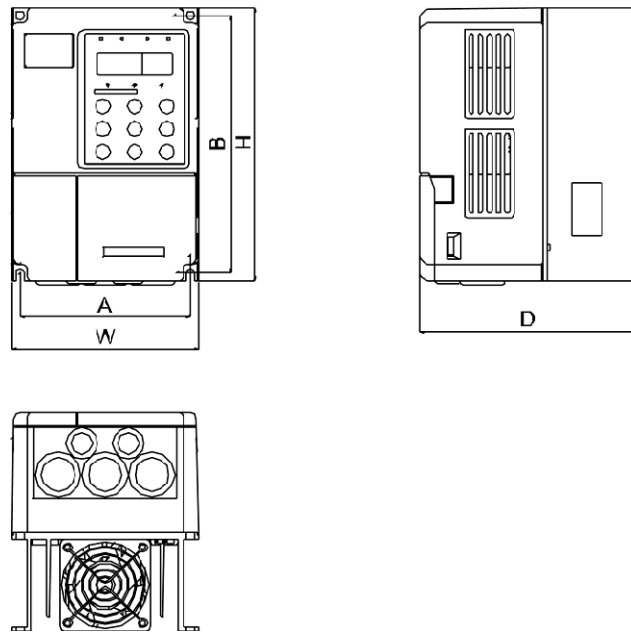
Schematic Diagram for Configuration & Mounting Dimensions of 0.4kW~ 15kW Inverter
